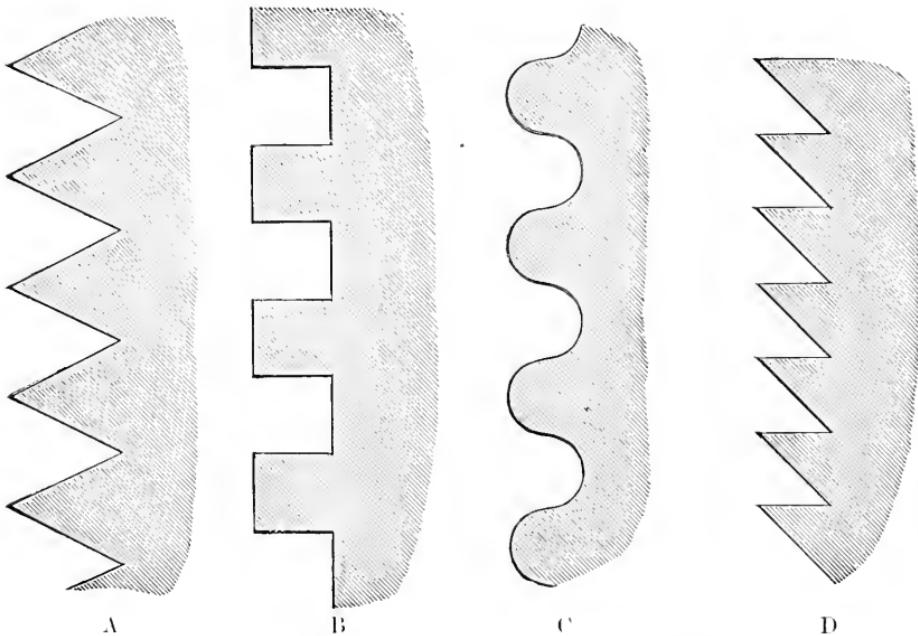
SHAPE OF DIFFERENT THREADS. (Page 43.)
